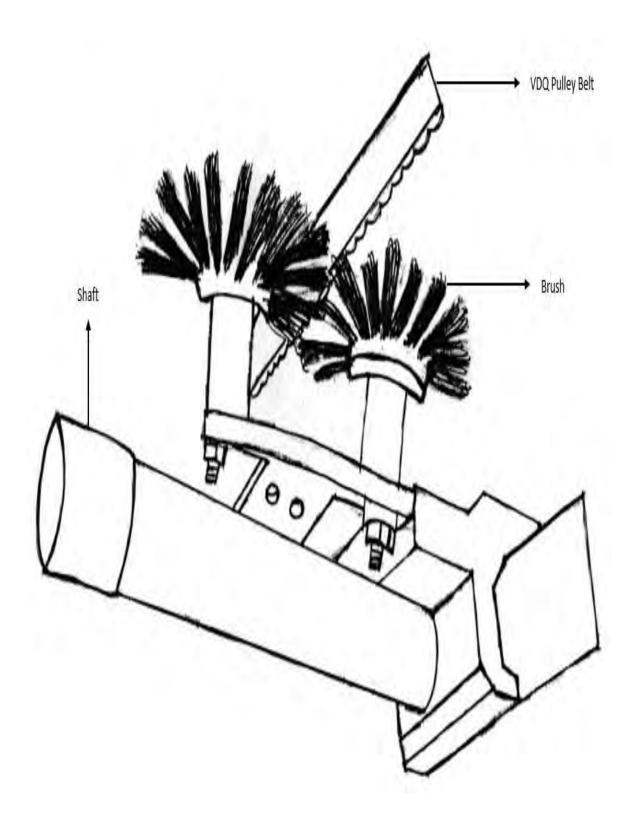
A schematic diagram for a single brush-shelf with brushes for circular knitting machine
